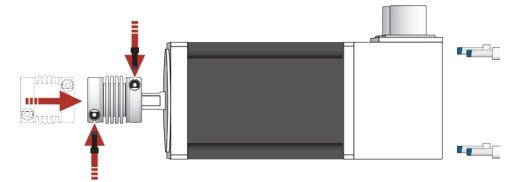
Attach the Coupling Adapter to the Motor Shaft
